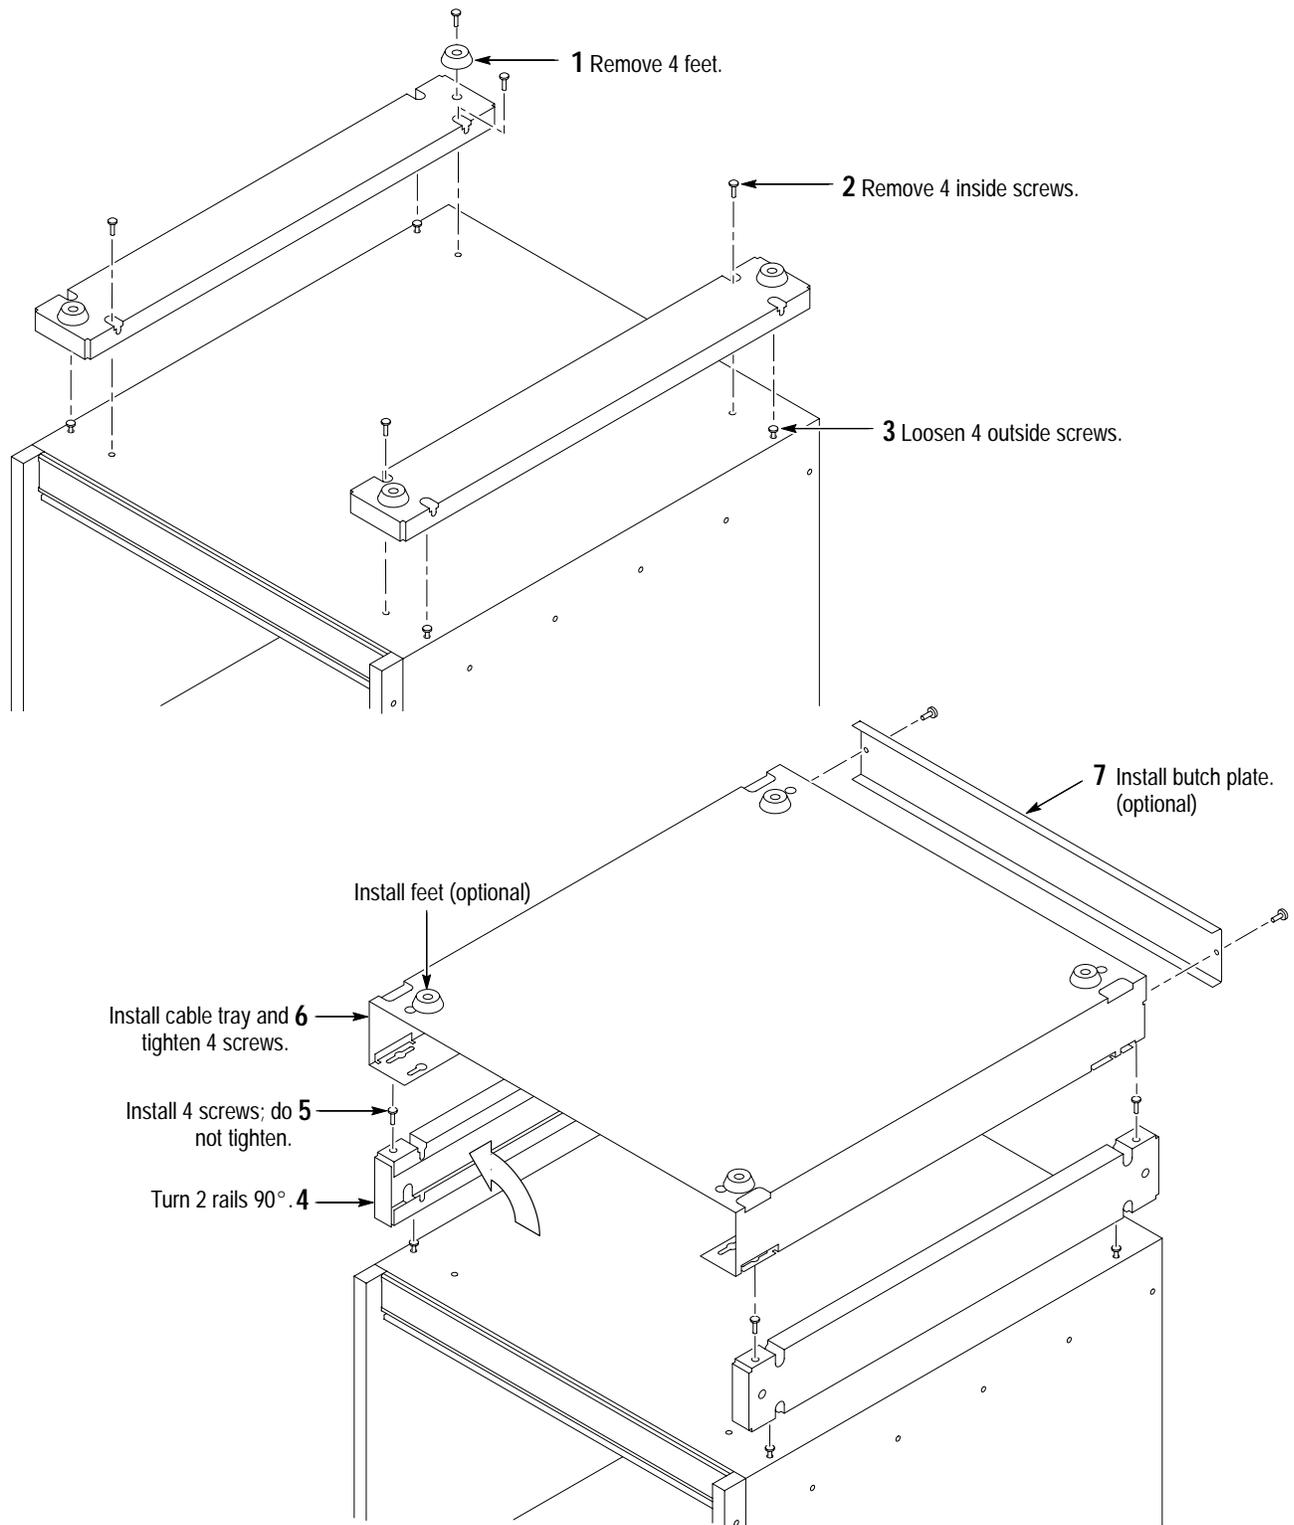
Installing the Option 1U as a 4.25-inch deep cable tray
